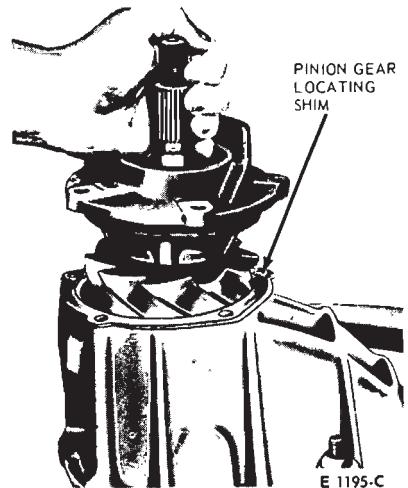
Removing or Installing Pinion and Retainer Assembly
